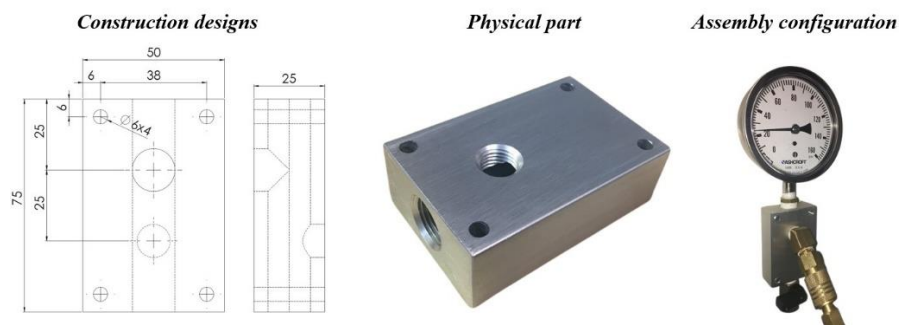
Indicative images of manifold: construction designs, the physical part and assembly configuration
